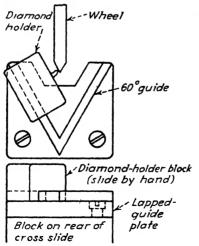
Fixture for dressing the grinding wheel with a diamond
